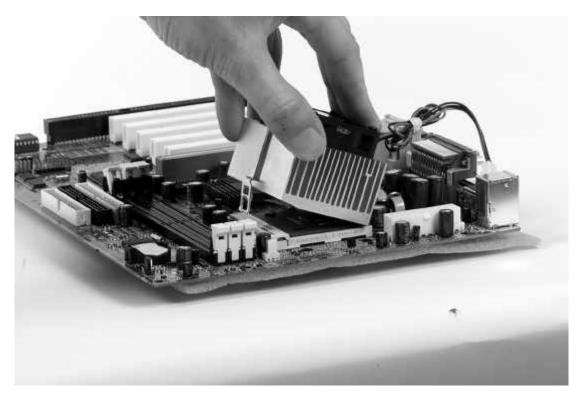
The WRONG WAY to Install a Socket A AMD Processor Heatsink
